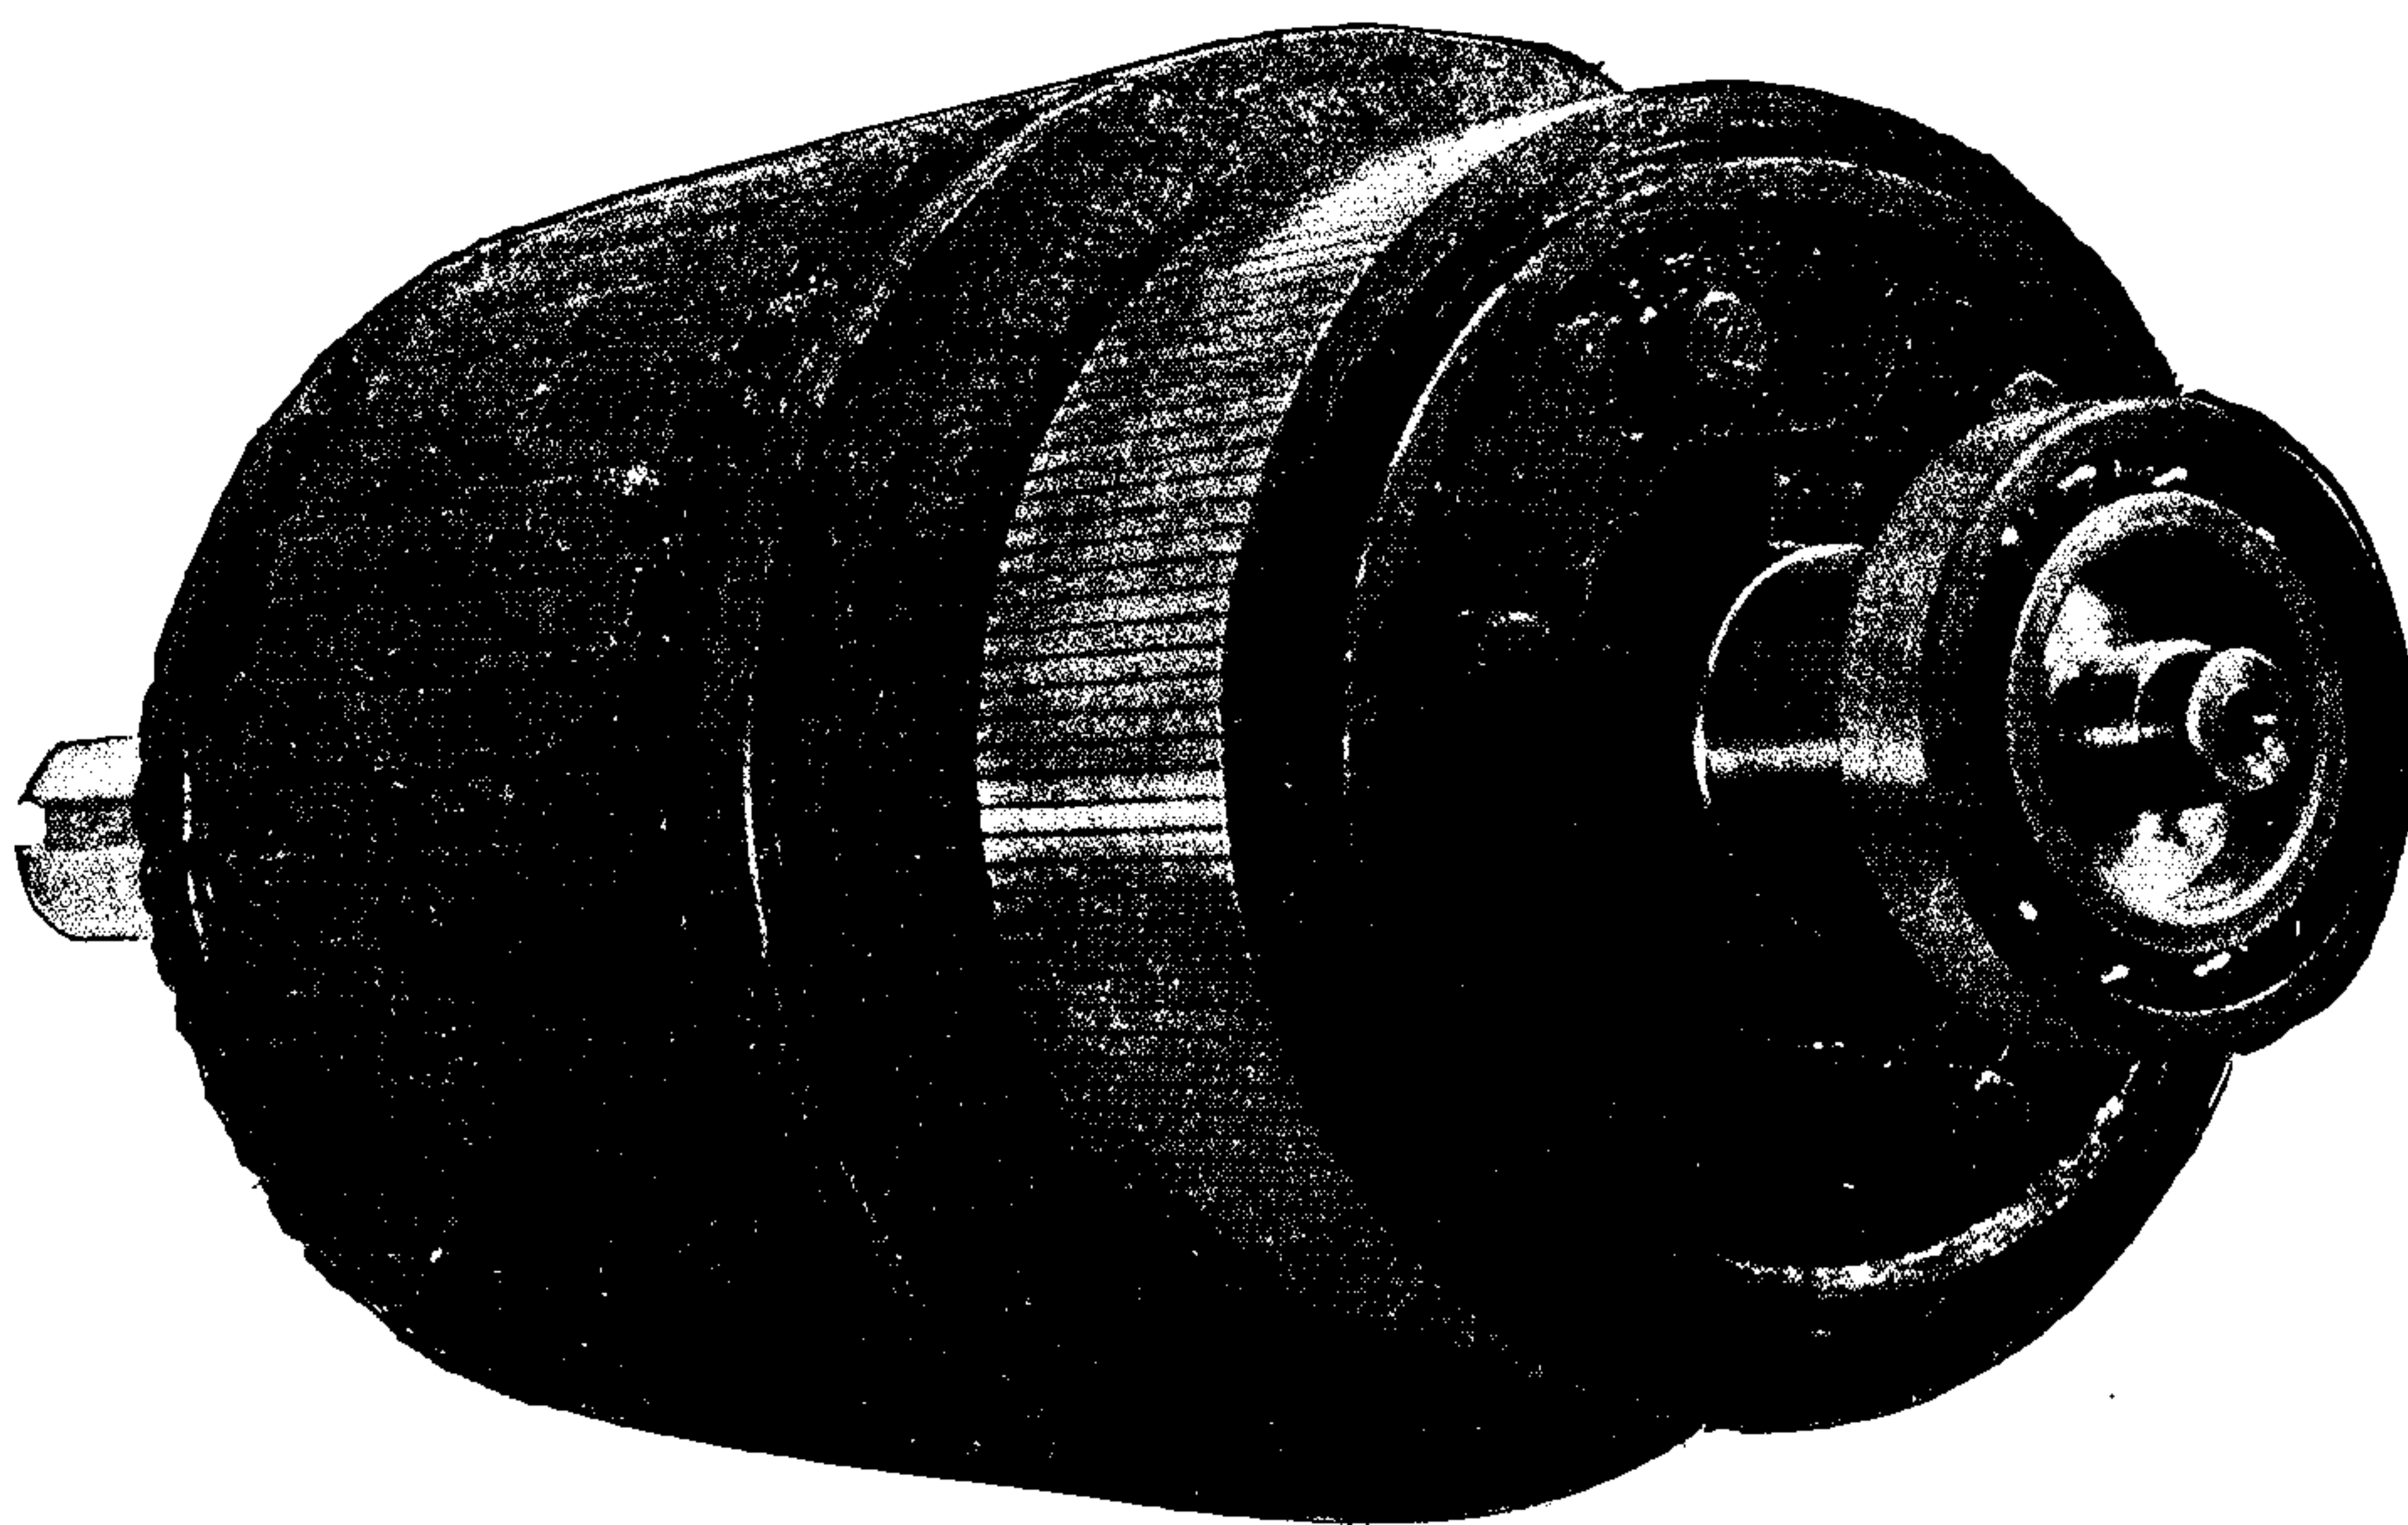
Interpole Motor Armature Showing Ball Bearings
